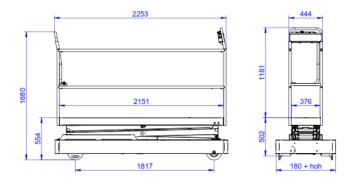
Minimum dimensions of the 2-scissor up to 3.5 meter
